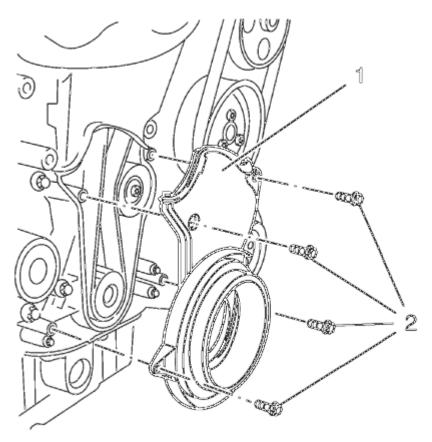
Timing Belt Lower Front Cover Courtesy of GENERAL MOTORS COMPANY
